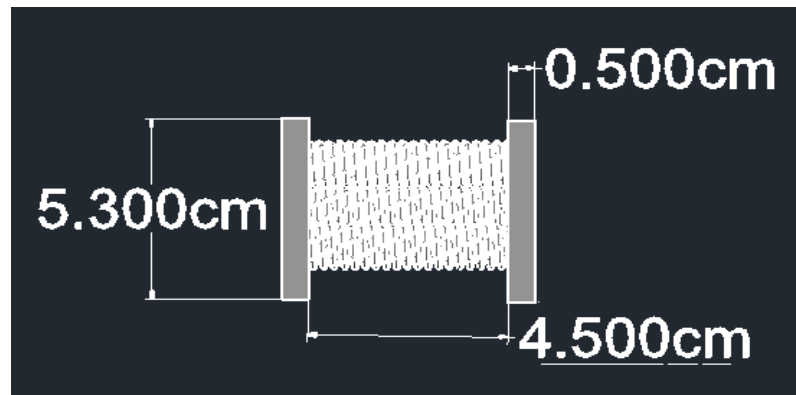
Final Design of Spring Coil Holder (Front View)
